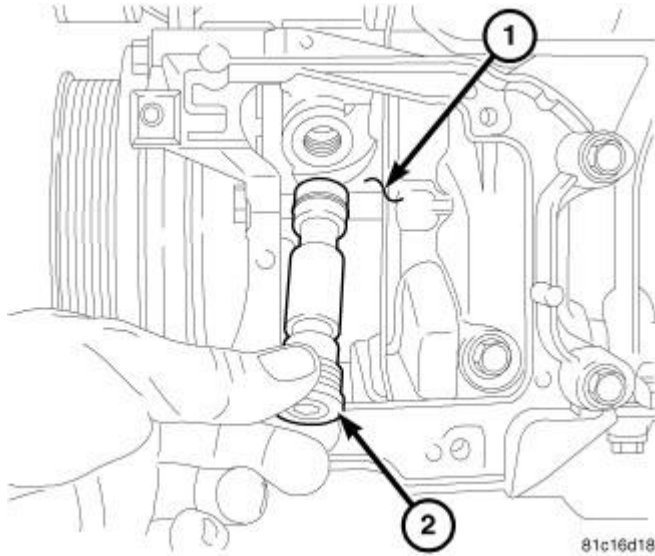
Oil Pressure Relief Valve Removal/Installation
